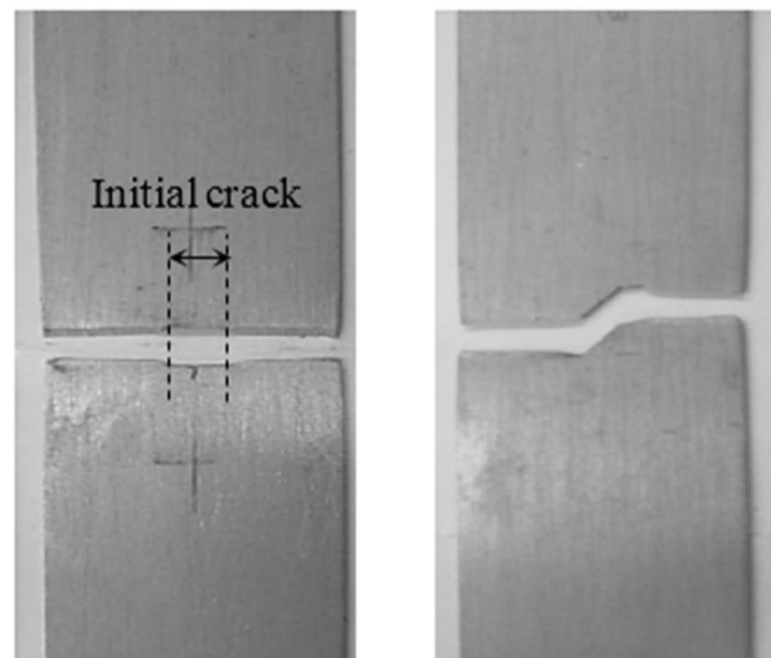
After test unrepaired specimen with 0° and 45° crack
